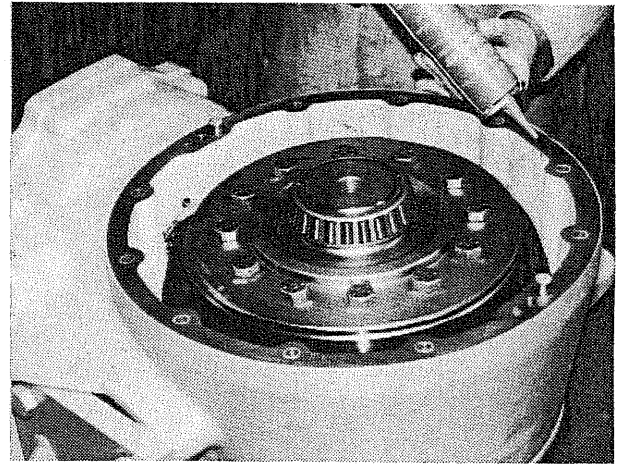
Drum & Freespool Assembly (3 of 7)
